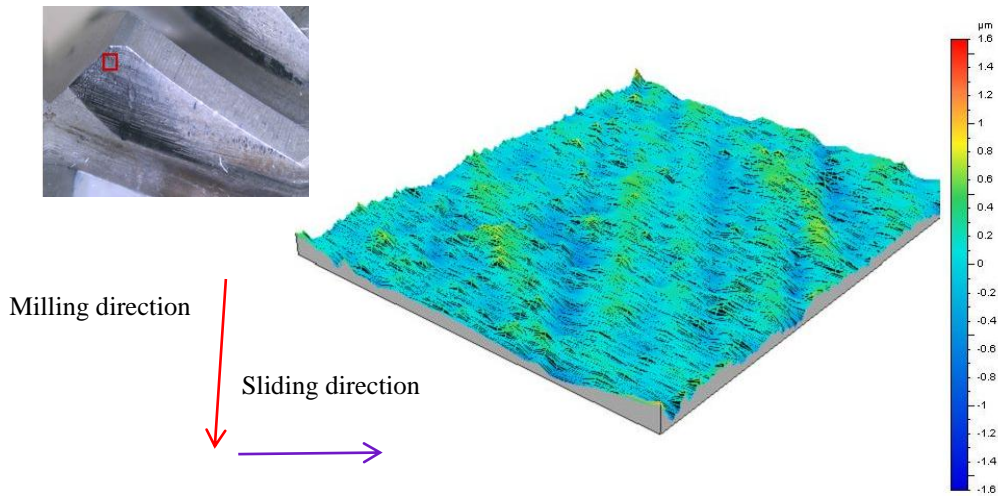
3D measurements of the gear flank after running-in test-set 1
